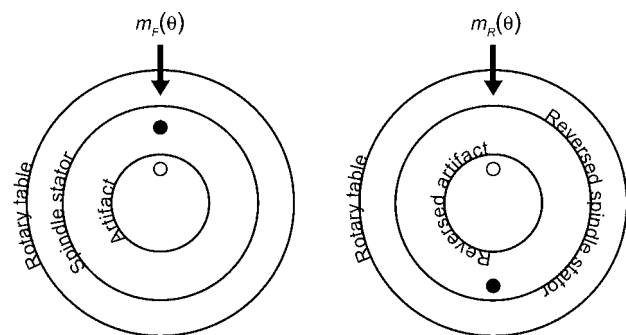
Schematic of the modified Donaldson reversal method using a precision rotary table and a reversal chuck
